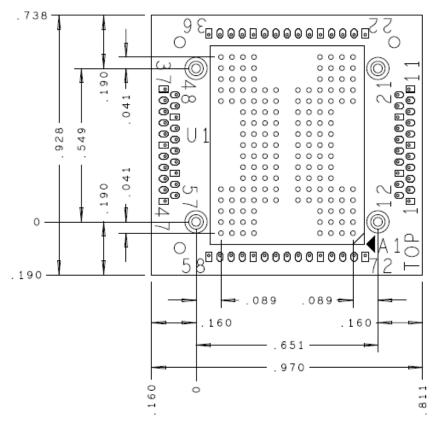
NAND152/132 Oscilloscope Component Interposer Mechanical Dimensions
